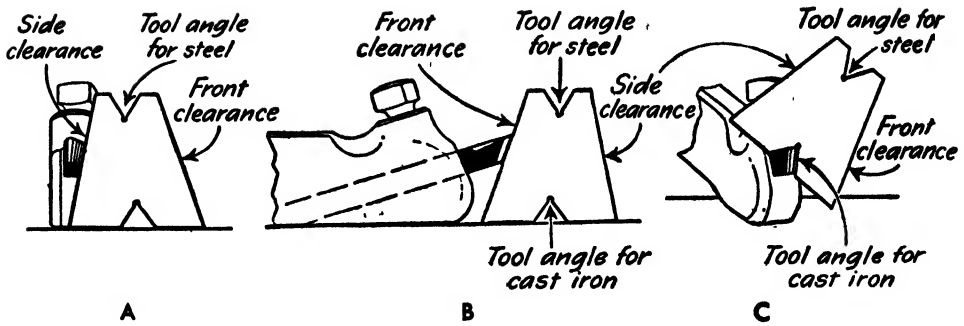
Checking the shape of a lathe cutter bit with a bit-grinding gage: A, checking side clearance; B, checking front clearance; C, checking the tool angle. (South Bend Lathe Works)
